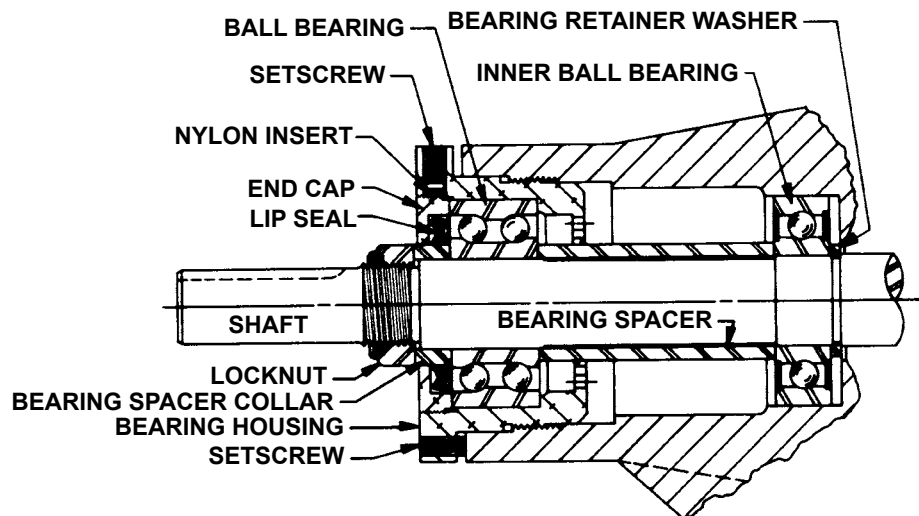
THRUST BEARING ASSEMBLY AS, AK AND AL SIZES
